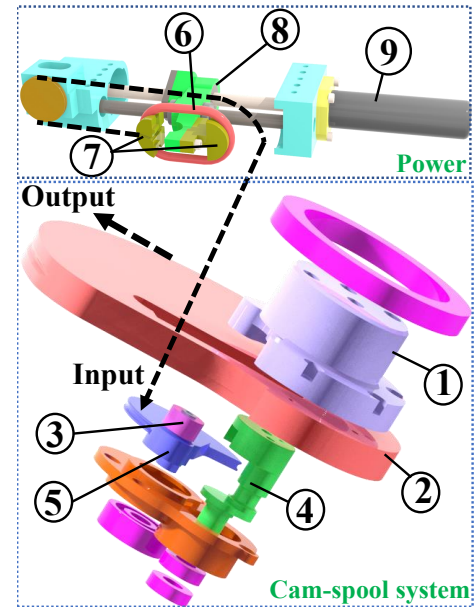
Mechanical design of the assistive device. 1- Flange, 2- Spool, 3- Roller, 4- Eccentric shaft, 5- Camshaft, 6- Bungee, 7- Supports, 8- Plate, 9- Motor.
